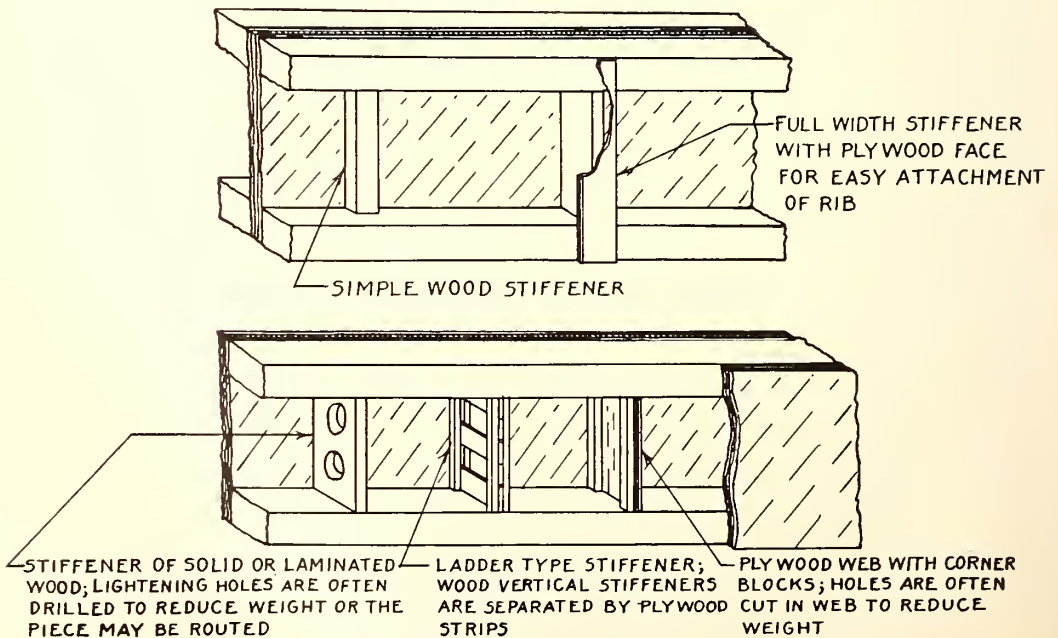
Typical Stiffeners for I and Box Beams.
